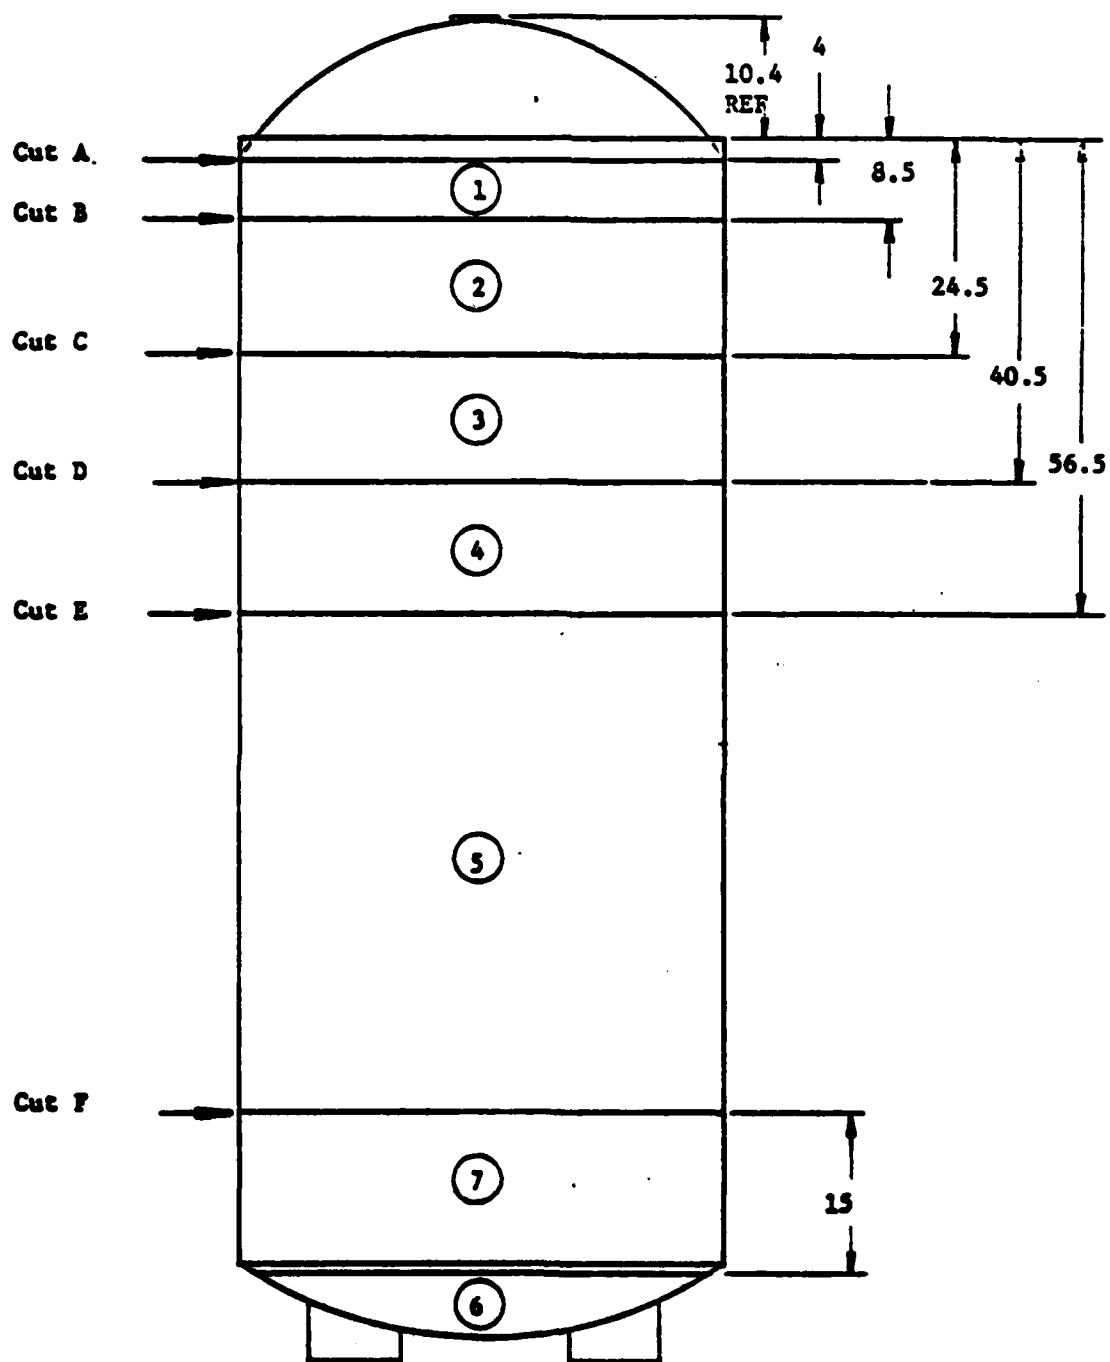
Dissection layout of Cuts, Locations and Section Numbers
